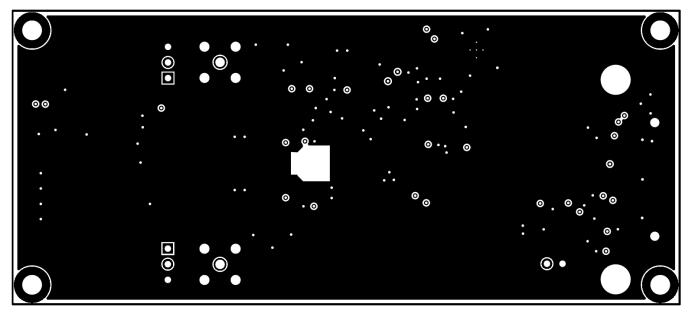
ADS8881EVMV2 PCB Layer 2: GND Plane
